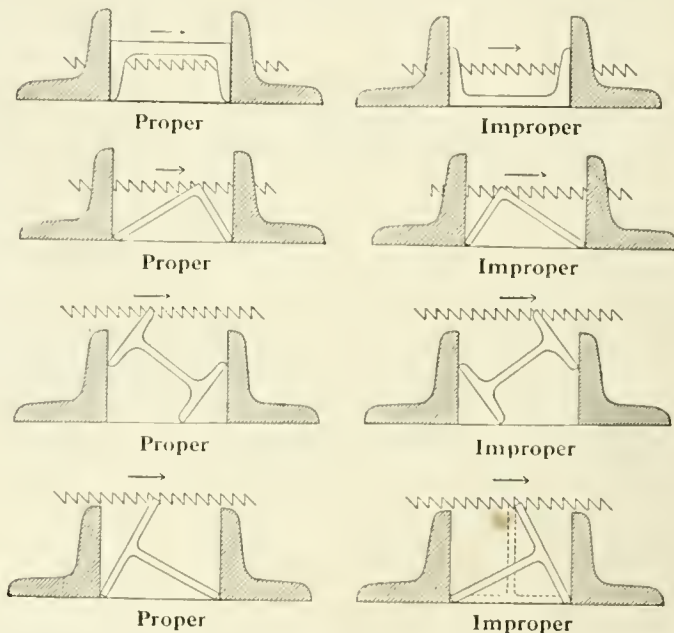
Proper and Improper Methods of Holding Various Shapes While Being Cut With a Hack Saw
